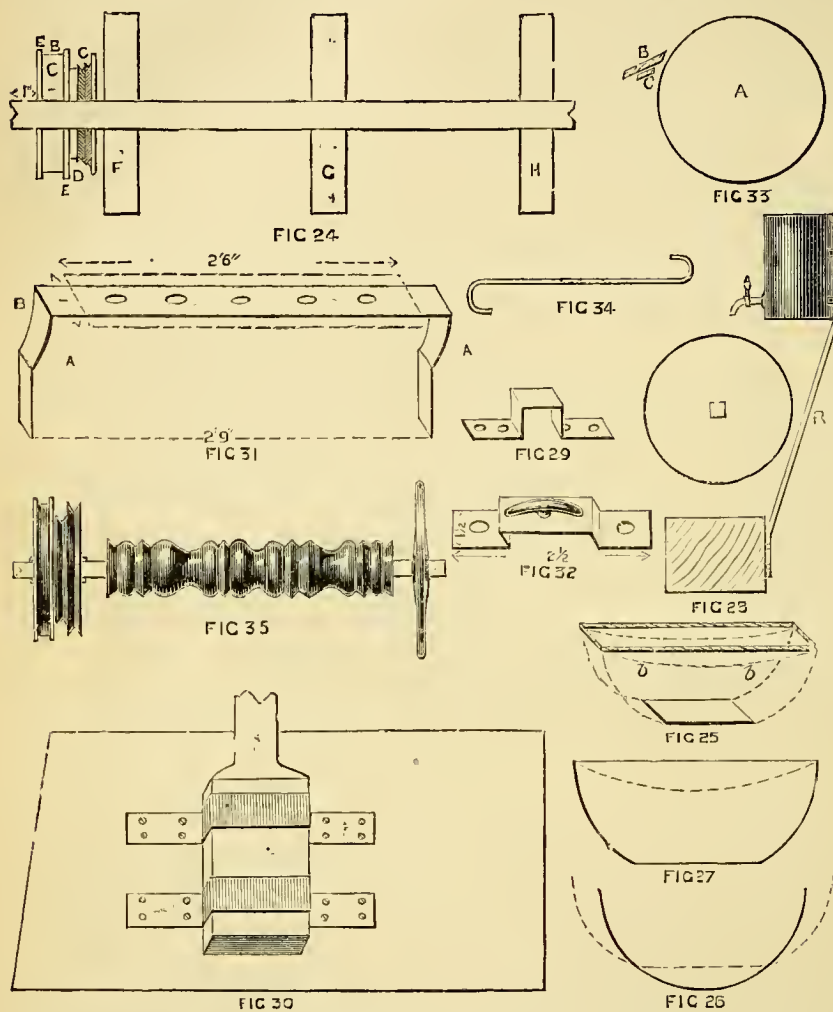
AXLE FOR CARRYING GRINDING STONES, ETC. FIG. 25.—TANK BELOW WHEEL. FIG. 26.—DIAGRAM SHOWING FORMATION OF BAND FOR BOTTOM OF TANK. FIG. 27.—SHAPE OF SIDES OF TANK. FIG. 28.—TIN RESERVOIR OVER STONE, AND MODE OF SUPPORTING IT. FIG. 29.—SOCKET ON BACK OF BEAM. FIG. 30.—BACK VIEW OF SUPPORT FOR RESERVOIR, SHOWING MODE OF FIXING IT TO BEAM. FIG. 31.—TOOL GRINDING REST AND ITS SUPPORT. FIG. 32.—SOCKET FOR RECEPTION OF SUPPORT OF REST. FIG. 33.—DIAGRAM SHOWING RELATIVE POSITIONS OF REST AND WHEEL. FIG. 34.—CONNECTING ROD BETWEEN CRANK AND TREADLE. FIG. 35.—LEAD CASE ON IRON BAR USED FOR SHARPENING CARVING TOOLS, WITH NARROW BUFF WHEEL.
